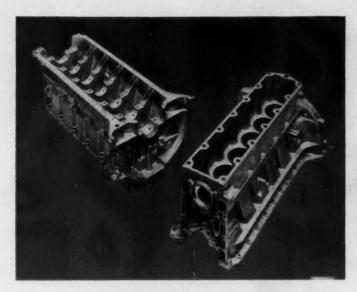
Cast aluminum engine used to drive accessories in the Firebird III. Shown is one half of engine as it was cast. Permanent mold or die cast methods could be used. Cylinder is cast integral with crankcase, using separate plates to form one side and top of water jacket.
